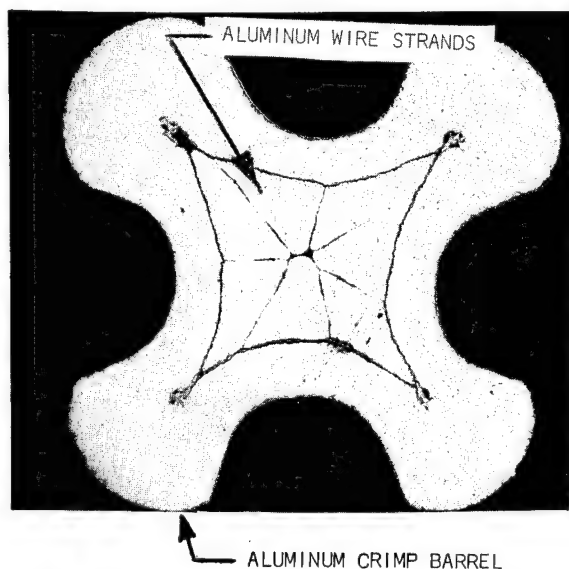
CROSS SECTION OF CRIMPED ALUMINUM BARREL ON 7 STRAND ALUMINUM 'EEE' #20 GAGE WIRE. NOTE EXTENSIVE DEFORMATION OF EACH STRAND.
